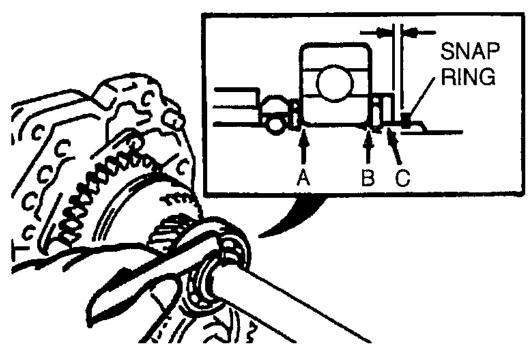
Installing Mainshaft Rear Bearing Courtesy of MAZDA MOTORS CORP.
